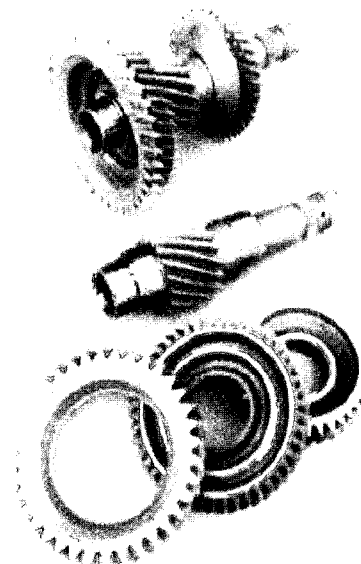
Laser/HF hybrid welding of gear for automotive use (Courtesy of Dr. E. Beyer)
